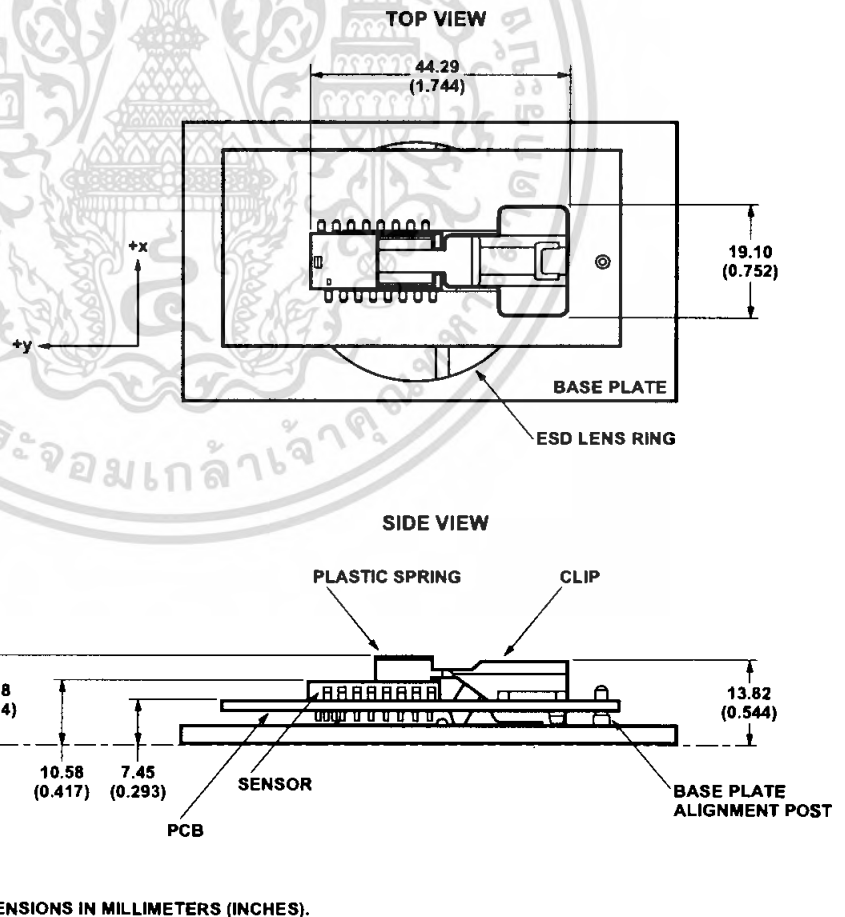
2D assembly drawing of ADNS-2051 (top and side view).
